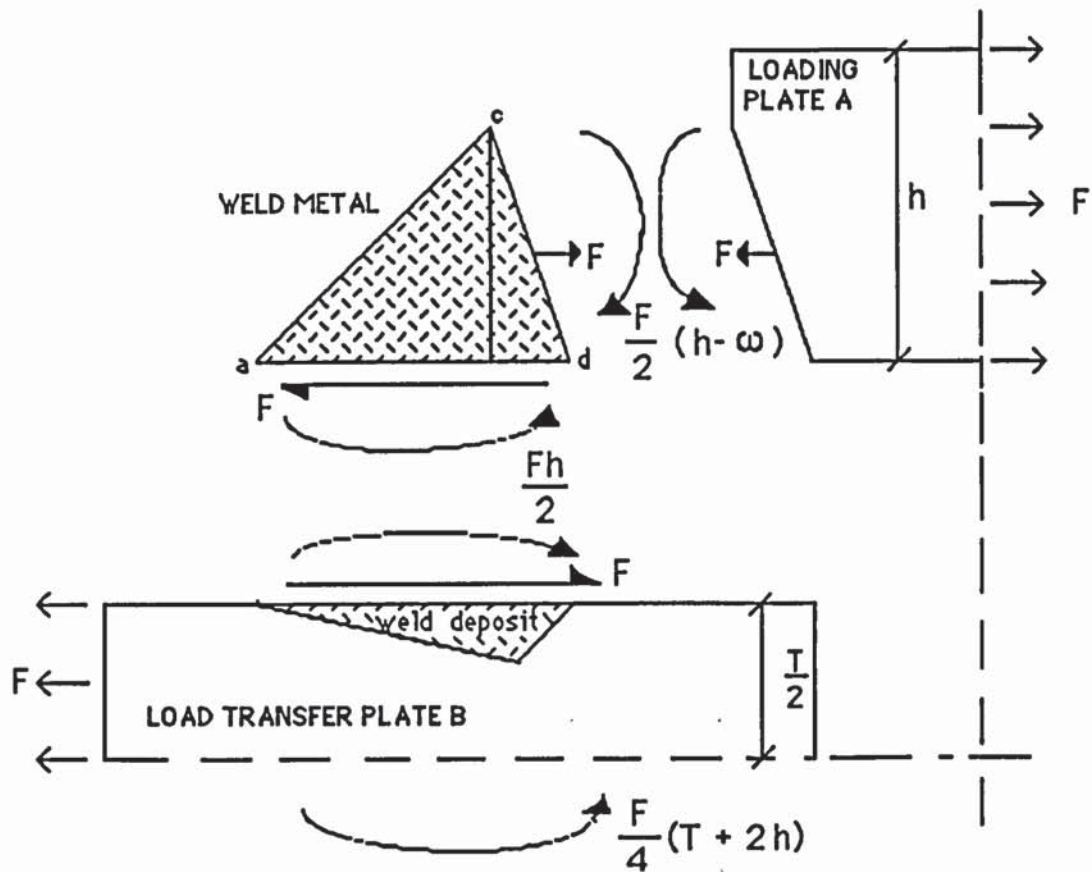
Equilibrium of forces on a single tensile weld.
